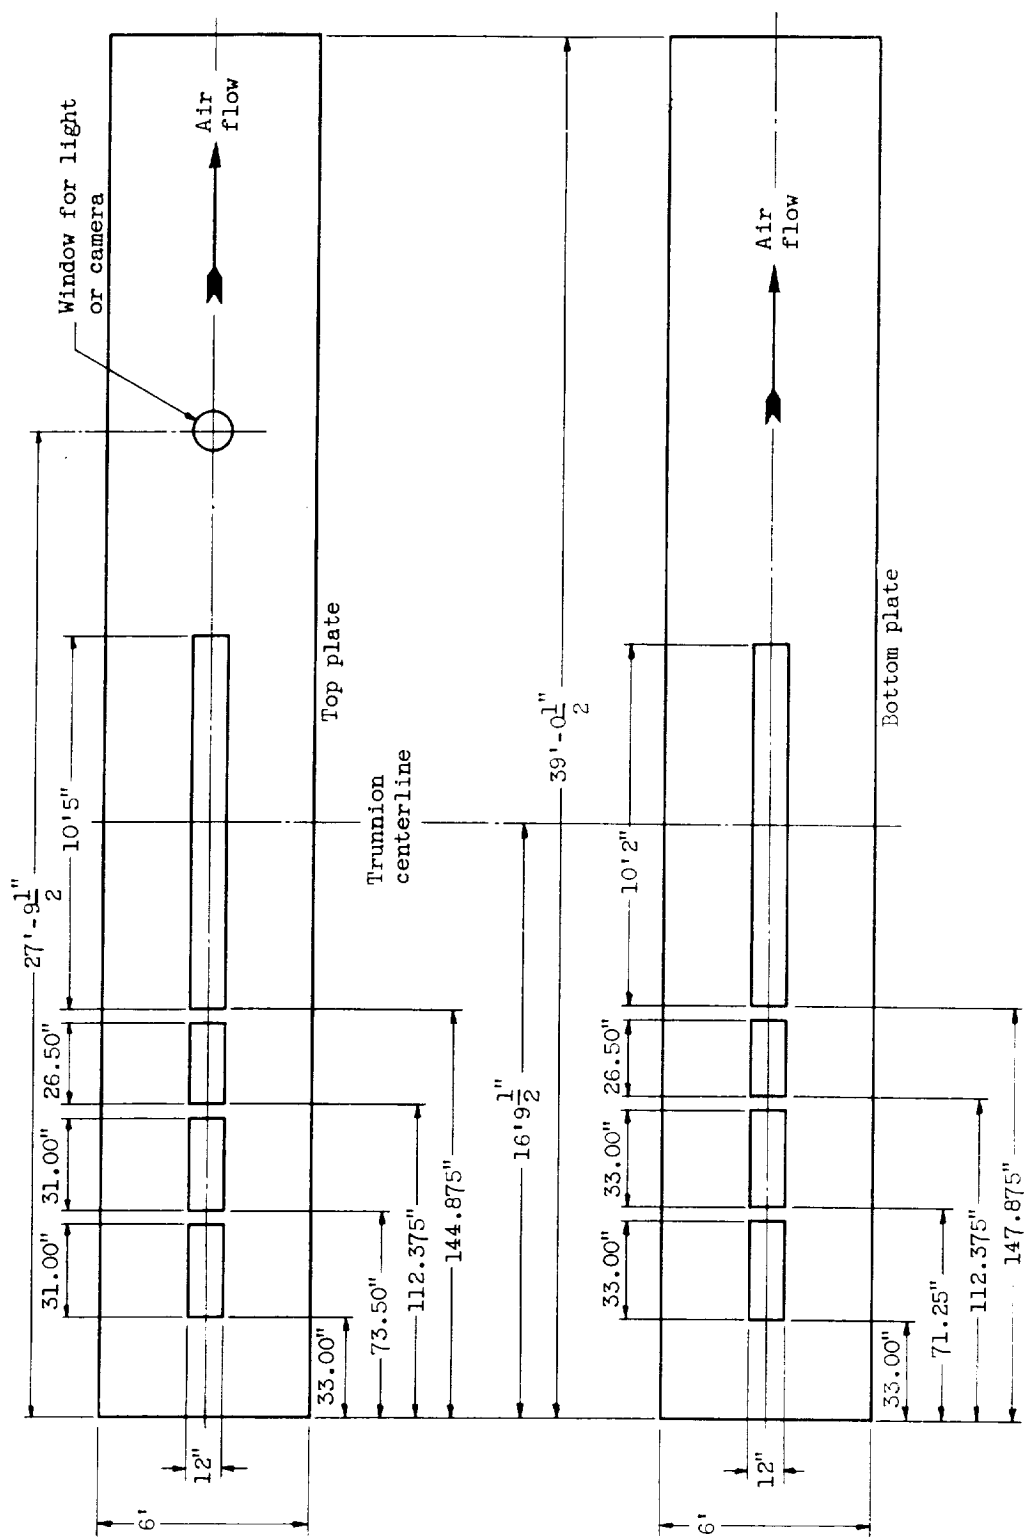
Top and bottom plate openings, test section, Lewis 8- by 6-foot Supersonic Wind Tunnel.
